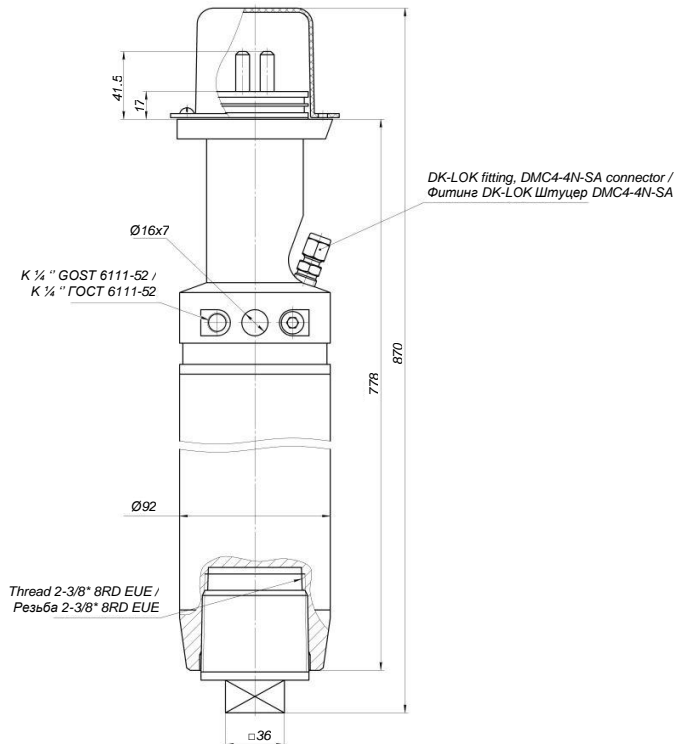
External view of the downhole sensor / Рисунок А.1 - Внешний вид блока погружного.
